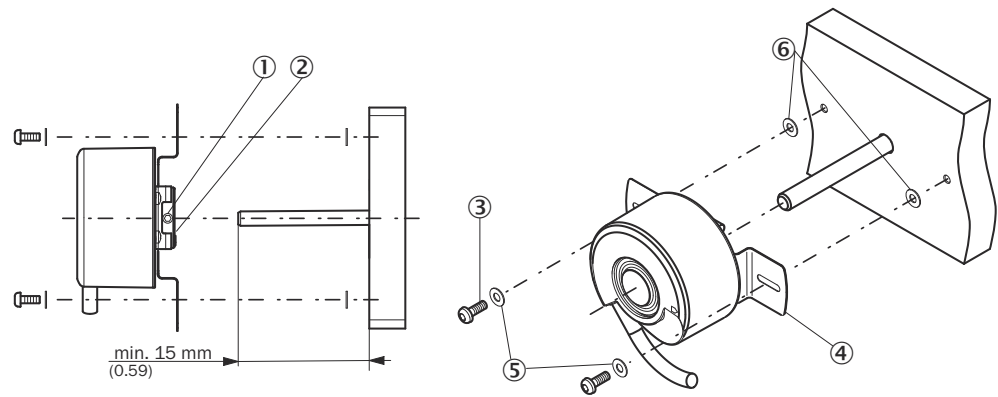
Mounting through hollow shaft with stator coupling 0, B, D, E, G (clamping at the front)
